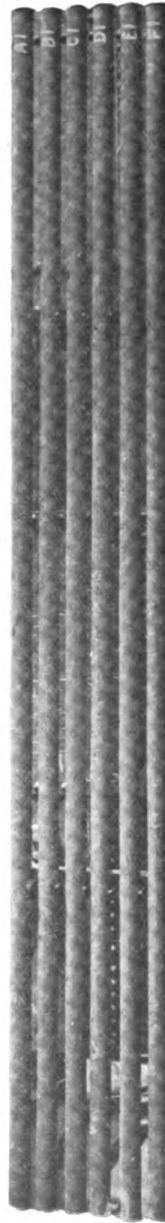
APPEARANCE OF TUBES, BOILER NO. 4084, AFTER DISMANTLING. VERTICAL ROW, FIRST ON RIGHT SIDE OF BOILER
